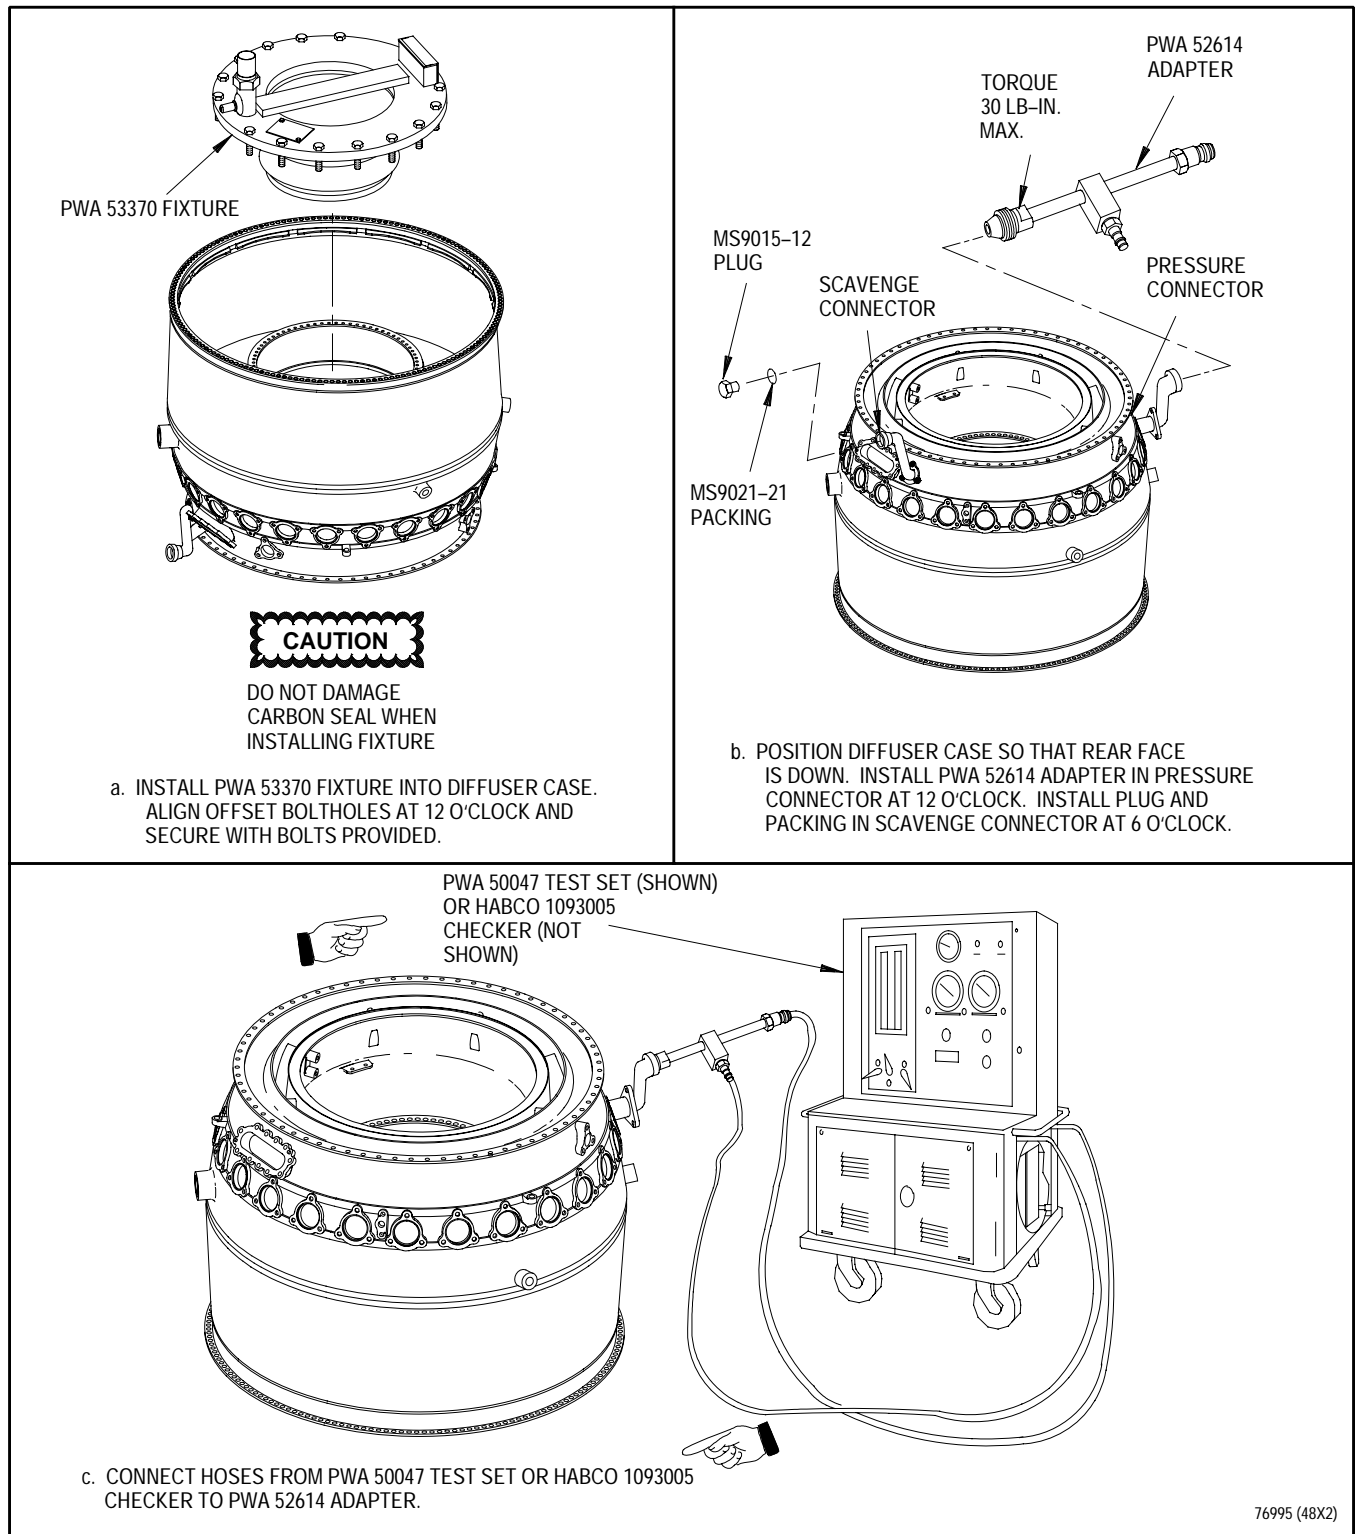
No. 4 Bearing Internal Pressure Tube Assembly, Internal Oil Pressure Manifold, and Internal Scavenge Tube - Leak Check Tool Installation
